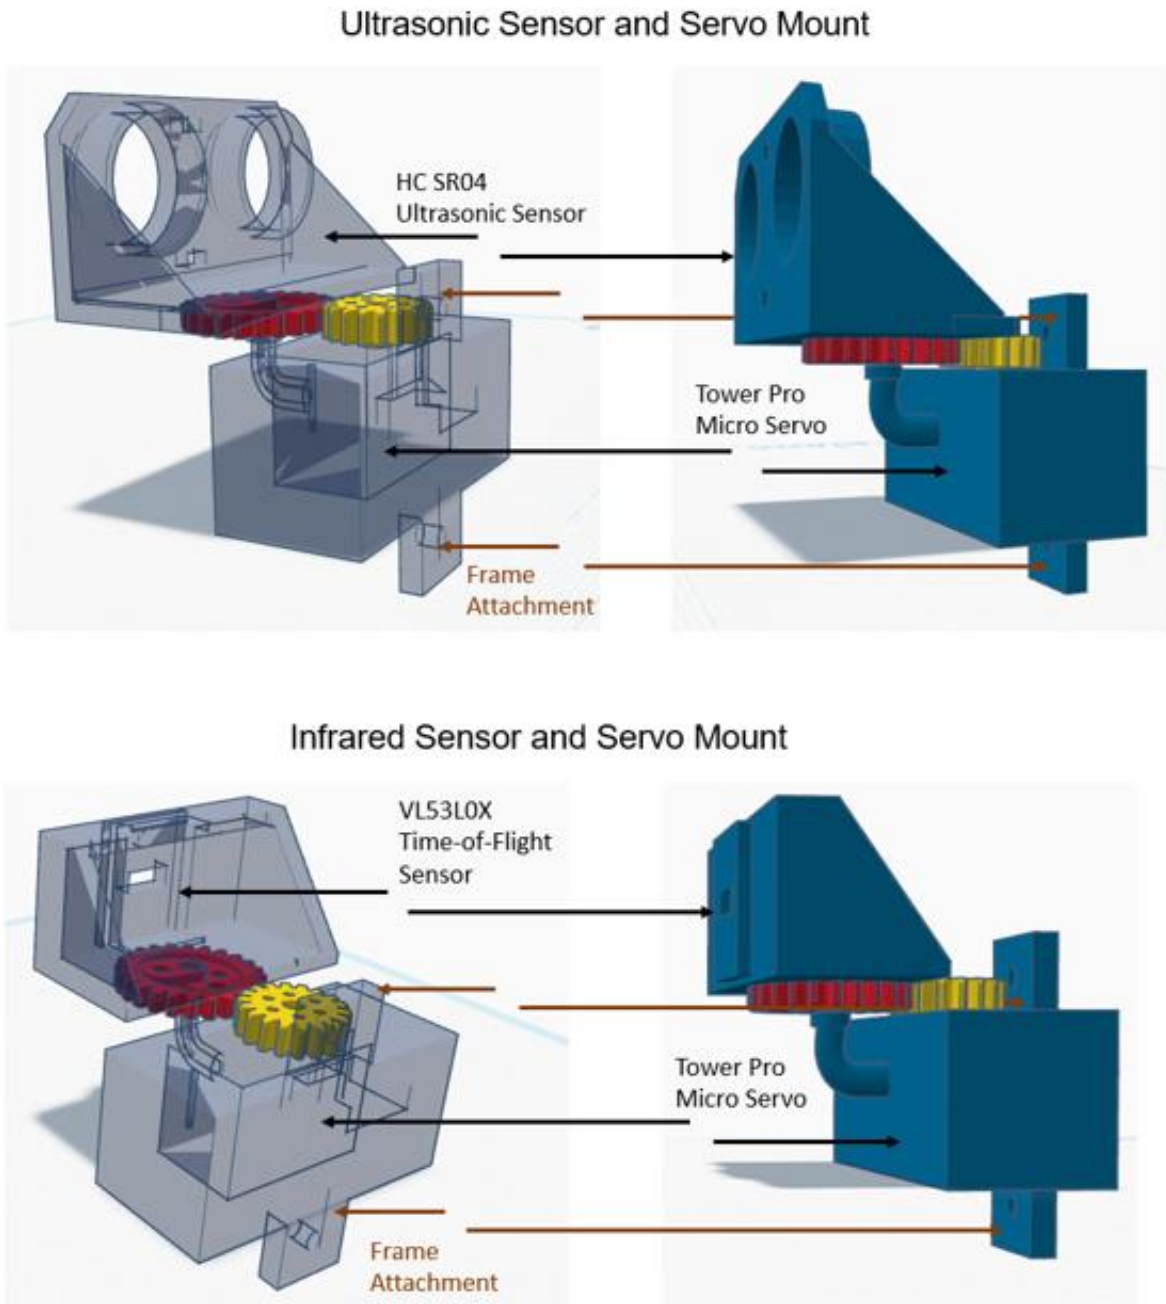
Sensor Mounts for Rotating Sensor Configuration.
